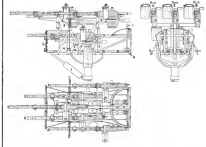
Improved design of a 5-gun turret mount. Incorporating variable fire pattern mount. 1. Hydraulic cylinder for elevating and depressing gun mount. 2. Control leverwork for lower gun "D" and "E" and support for center gun "B". 3. Support for lower gun "C" and "D", 4. Support for upper gun "A" and "E". 5. Control lever handles for rotating gun and battery. 6. Control leverwork. 7. Control lever for rotating battery mounted on the central hand ship which are connected in electric trigger firing device.
